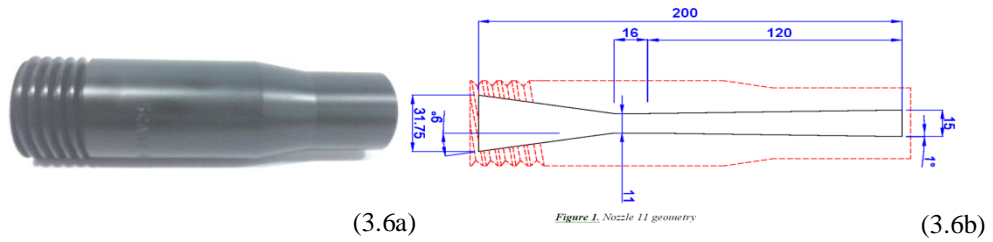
6). a: Shot Blasting Nozzle; b: Geometrical dimension of computed Nozzle
